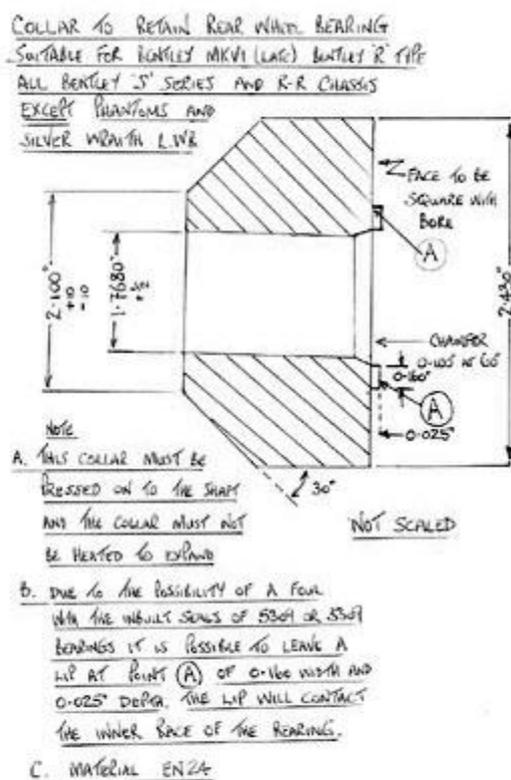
A sketch of the GB 4956 wheel bearing retaining collar
